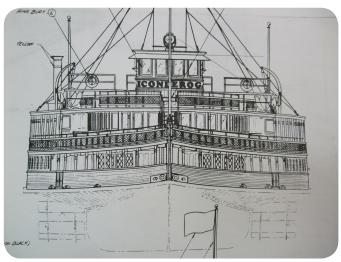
The plan drawings show that the outer walls are slanted inward from the vertical plane which resulted in a reduction in the size of each consecutive deck.
